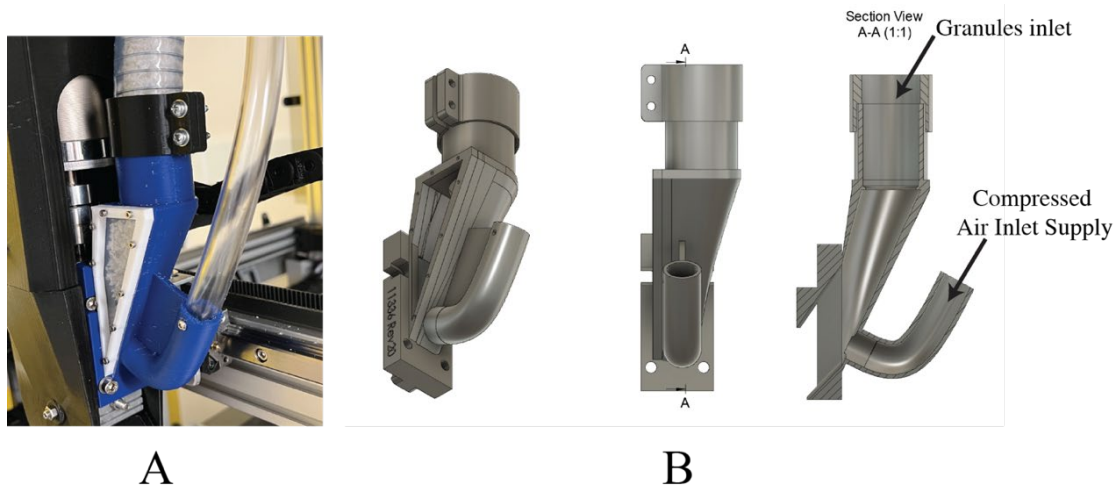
Photograph of the installed fluidized bed feed throat (A). Feed throat CAD design with section view (B).
